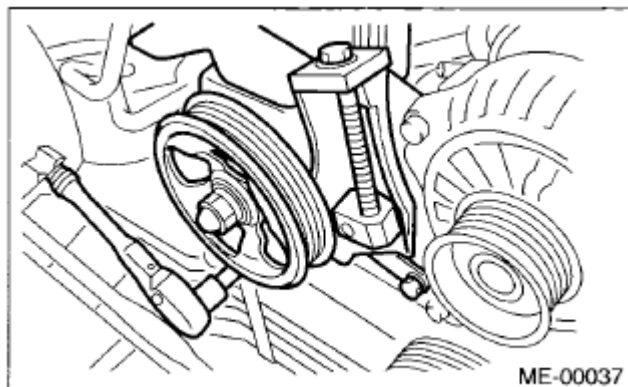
Identifying Power Steering Pump And Bracket With Bolt
